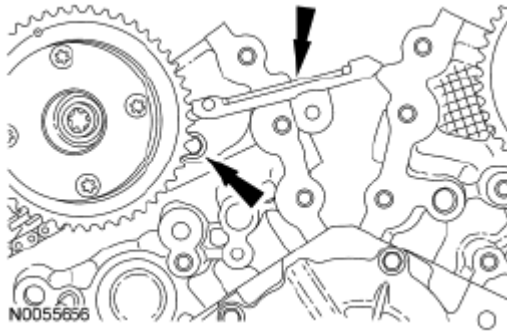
Locating Primary Timing Chain Guide And Upper Bolt - RH
